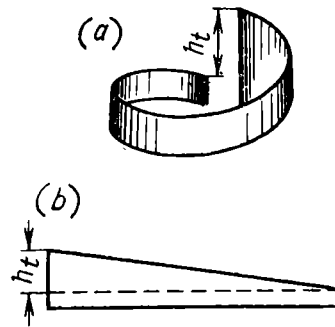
Bearing (levelling) ring of cylindrical winding
